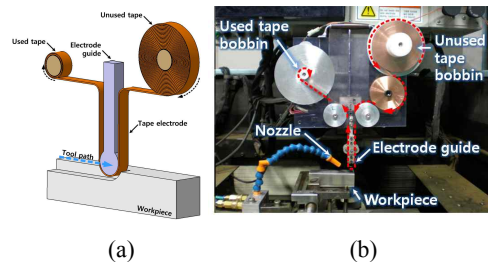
Tape EDM system: (a) A schematic diagram, (b) A machining system on a EDM machine
